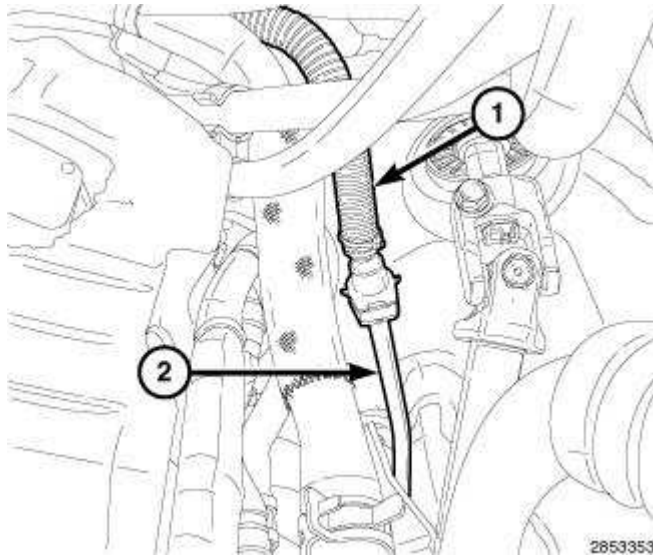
Fuel Supply Hose At Underbody Fuel Supply Tube
